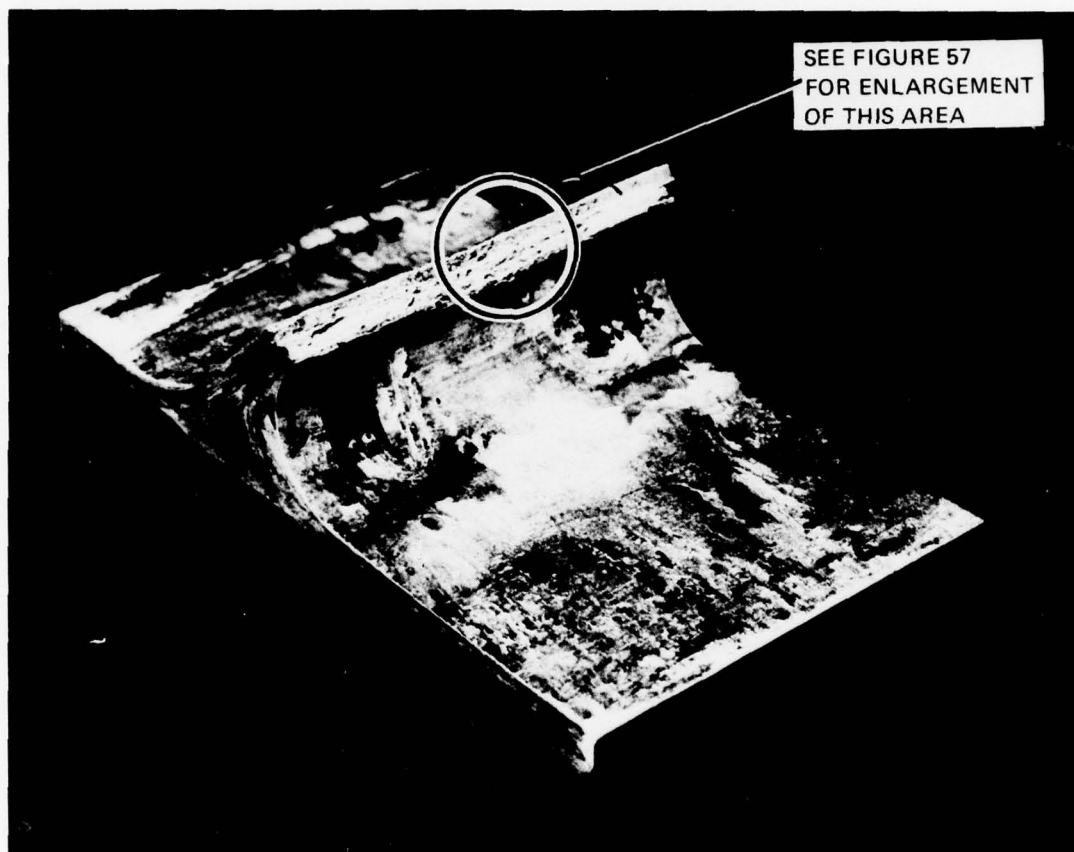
Fracture Surface of Specimen SK27377.
